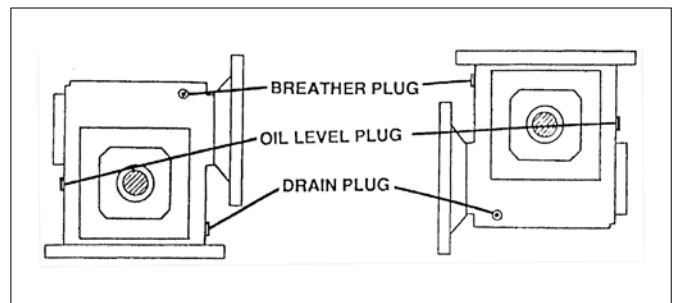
GEARBOX SCHEMATIC (TYPICAL)
